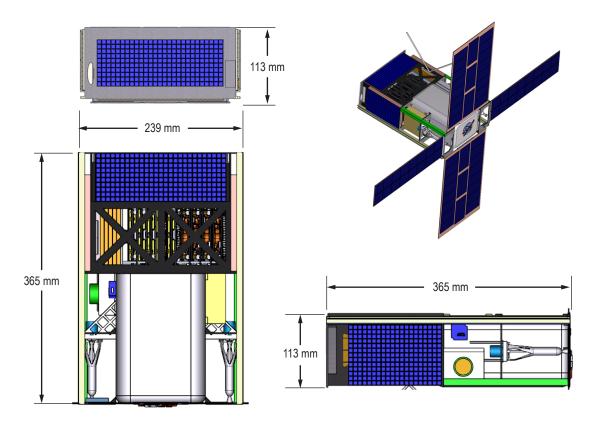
The MoonBEAM spacecraft layout showing the stowed and deployed configurations.
